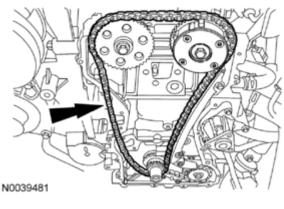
Locating Timing Chain Courtesy of FORD MOTOR CO.
